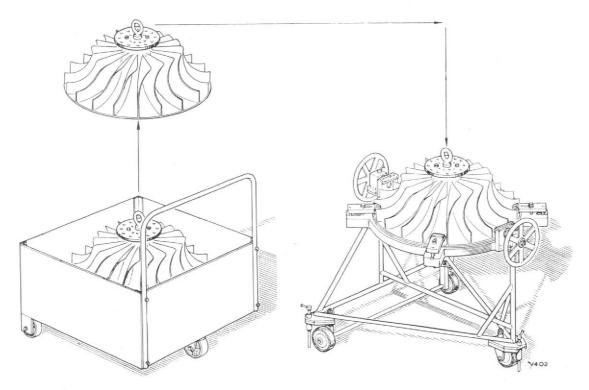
Using lifting plate T.72420 to transfer impeller from box trolley T.77555 to cradle trolley T.76578.
